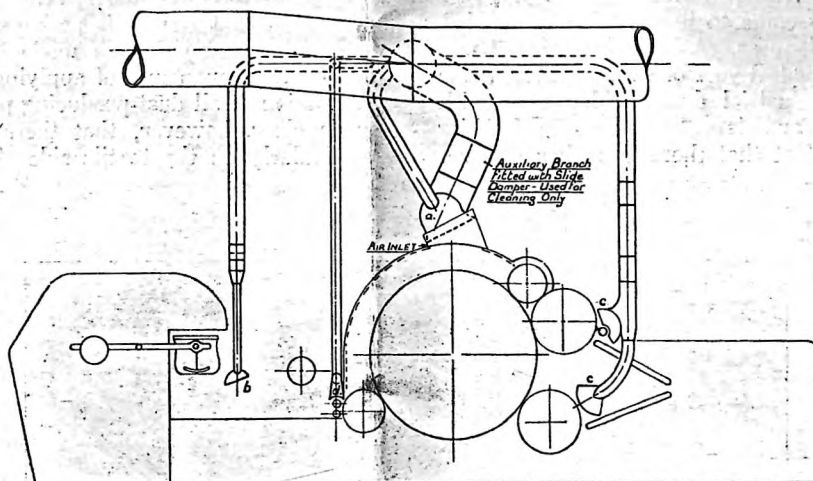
EXHAUST FOR CARDING MACHINE.
